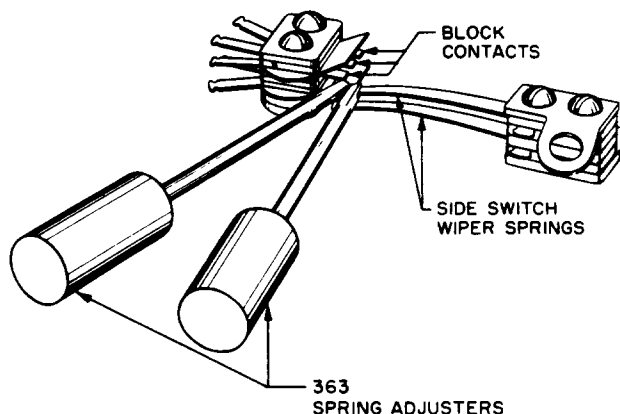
Method of Adjusting the Side Switch Wiper Tips
